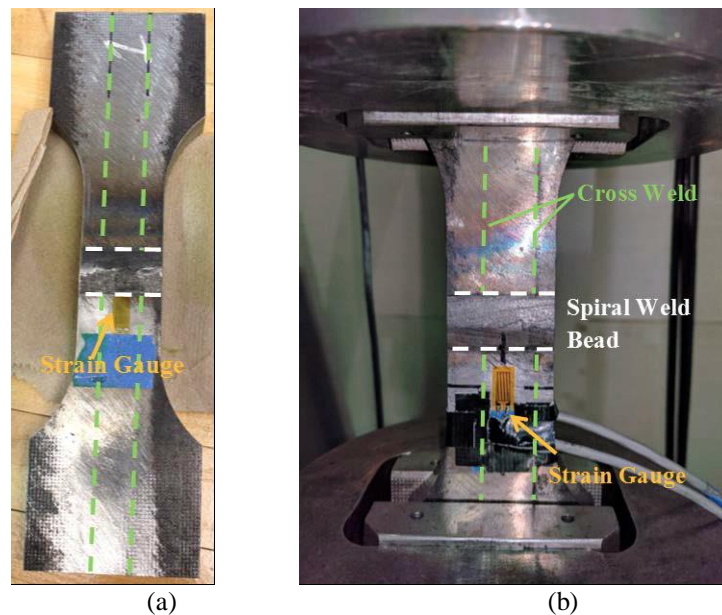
Photos of (a) fatigue specimen with strain gauge below the transverse weld and (b) the specimen in the hydraulic grips with both welds highlighted (Jay 2017).
